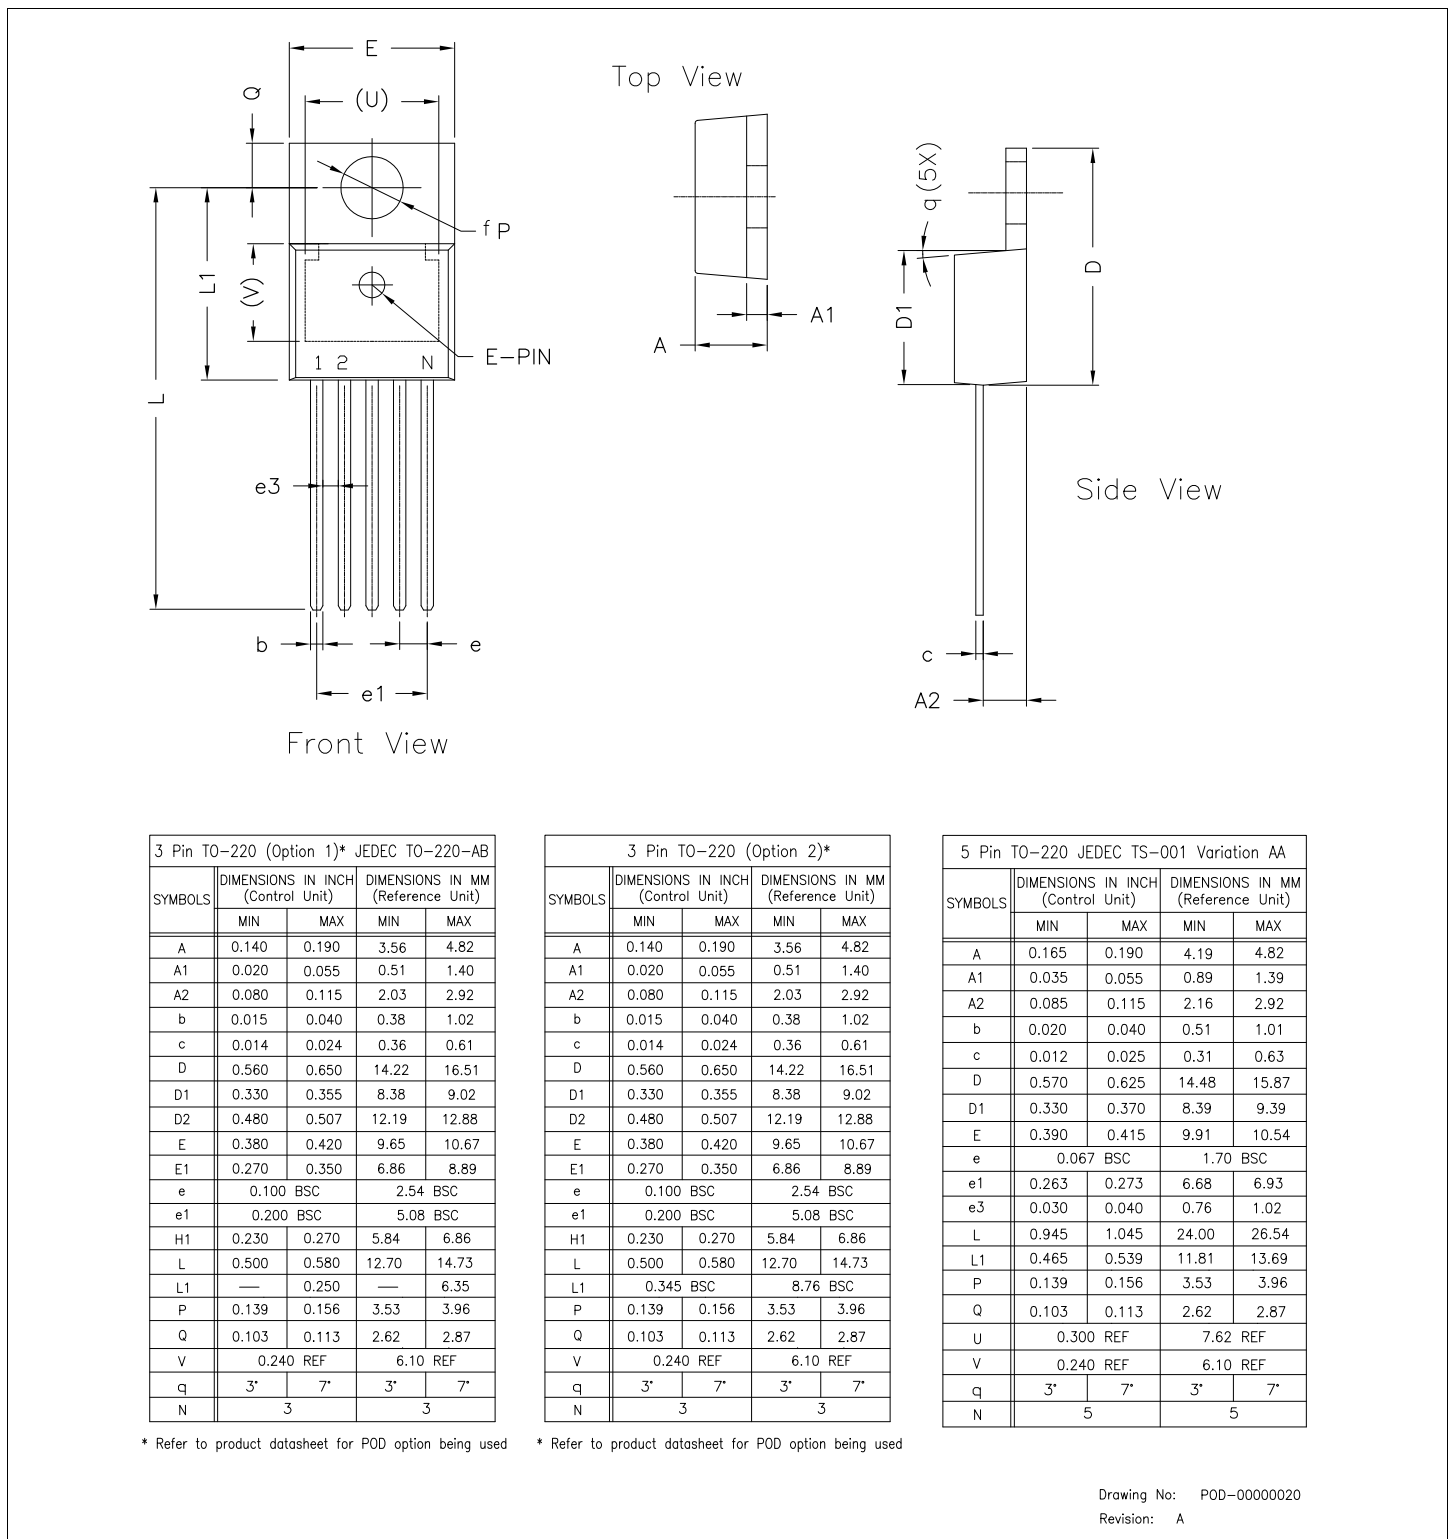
Mechanical Dimensions—3-Pin and 5-Pin TO-220
